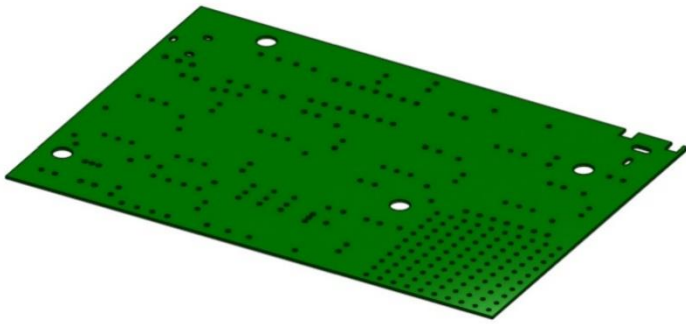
Imported PCB CAD model unzipped from STEP file from Altium Designer
